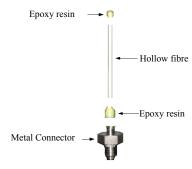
Mounting of the fibre on a metal connector using epoxy resin to carry out the bubble test of support
